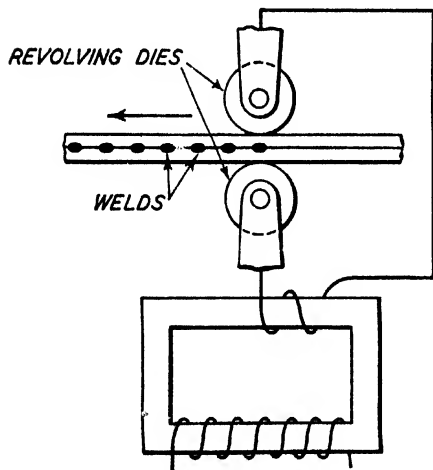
PRINCIPLE OF LAP SEAM WELDING
